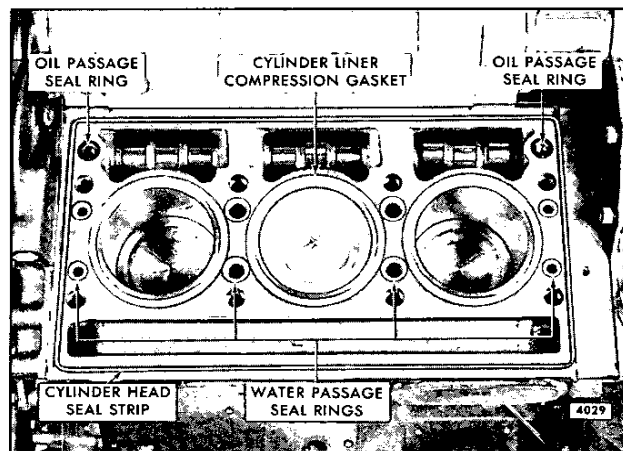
Cylinder Head Gaskets and Seals in Place on Cylinder Block
